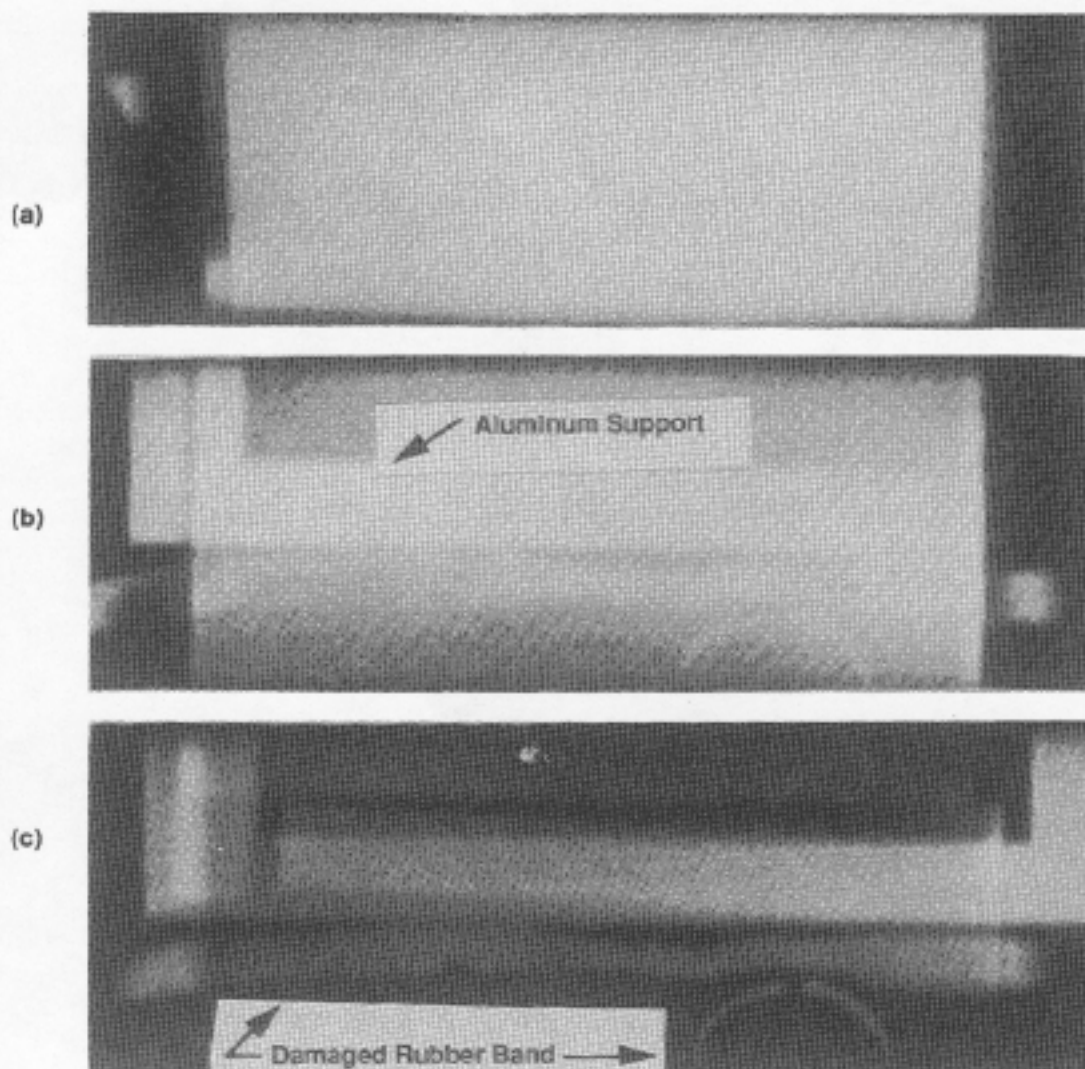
Compton Backscatter Image Slices Approximately 0.8 mm Thick Obtained with the Prototype ComScan Machine Showing Cut Rubber Bands Simulating Damaged O-rings Covered with 3 mm of Aluminum. Image slice (a) is inside the 3-mm-thick aluminum top layer; slice (b) contains the bottom side of the aluminum top layer, some underlying aluminum support structure, and partial image of the cut rubber bands; and slice (c) contains the simulated O-rings and the aluminum support structure.
